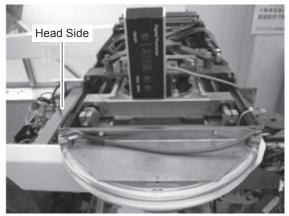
Checking Levelness in Horizontal (Left-Right) Direction 3
